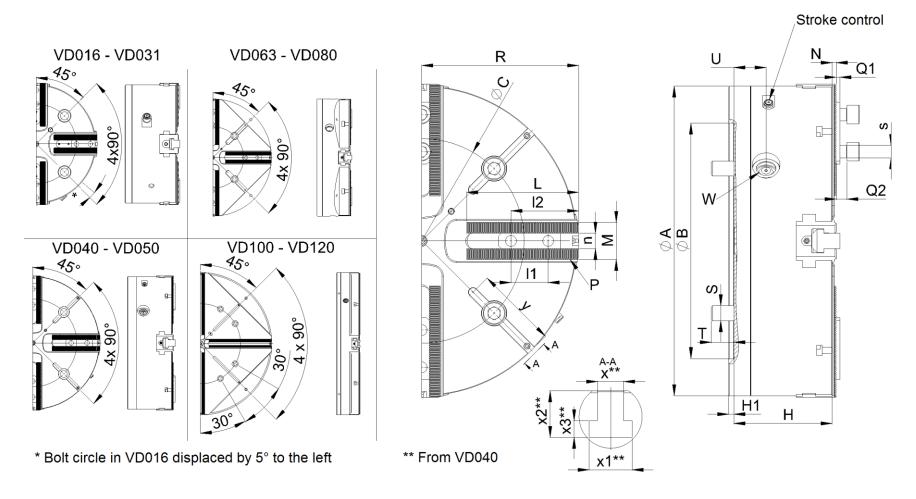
Mounting dimensions VD016-VD100 [Subject to technical change]
